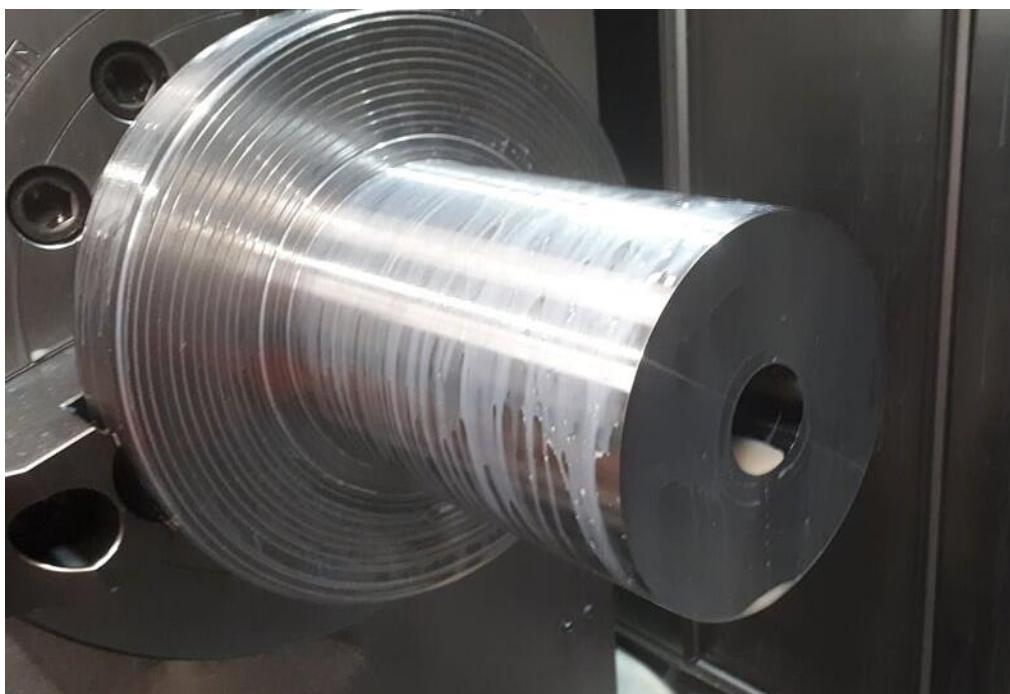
Workpiece before boring, pre-drilled hole in centre.
